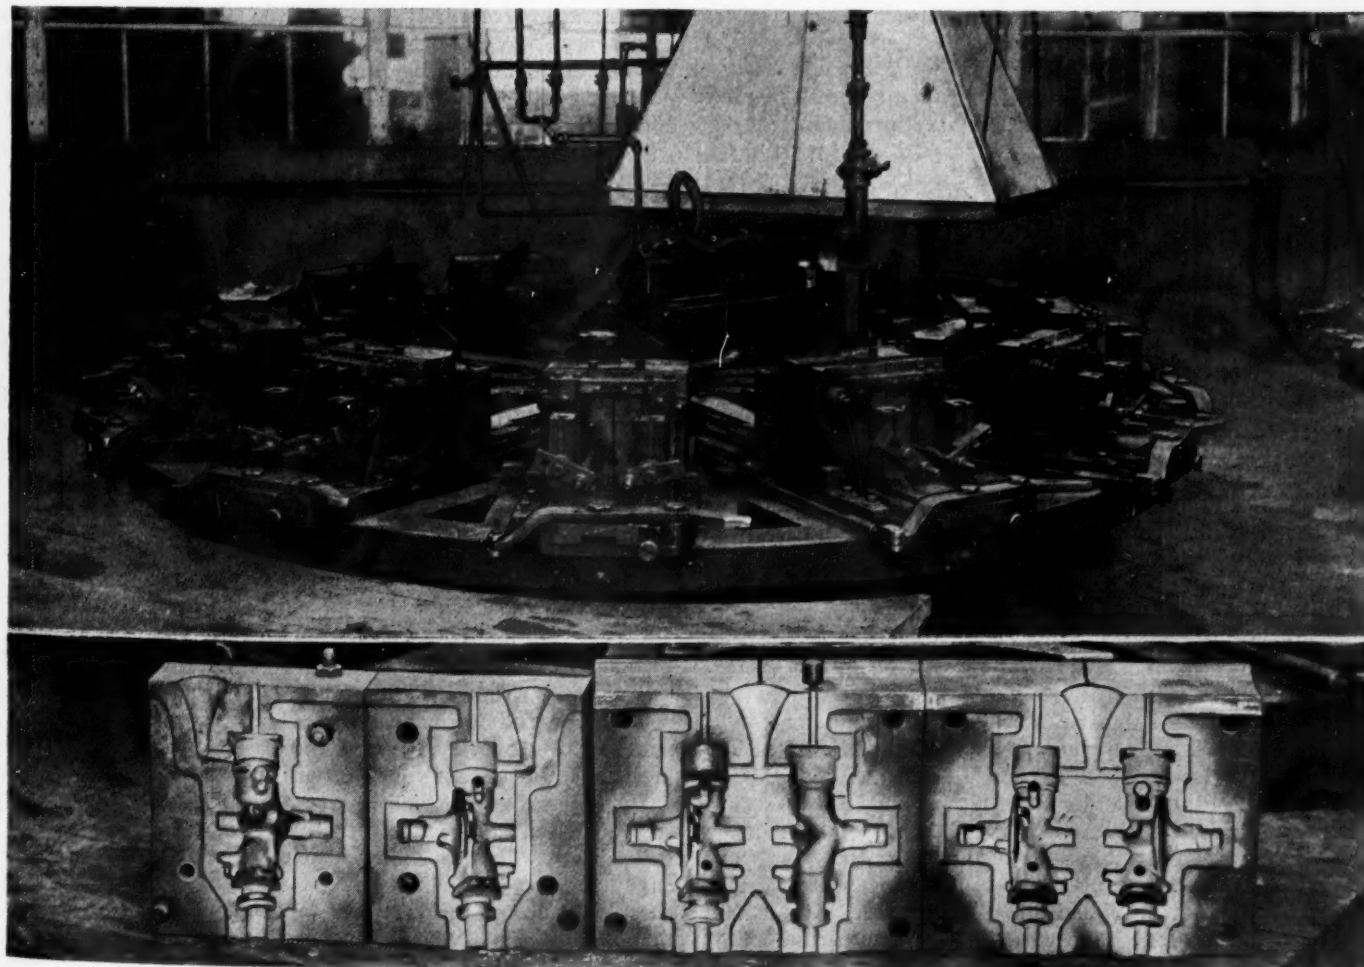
(bottom)—Molds used in the Holley process which are themselves cast in metal molds instead of being die-sunk. Fig. 11 (top)—Close-up view of one of the molding machines
